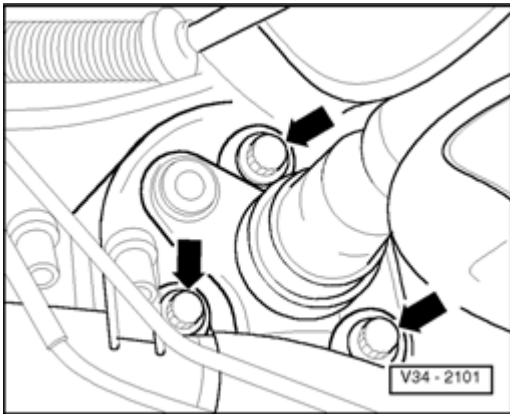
Identifying Bevel Gear Transfer Case Flange Bolts
